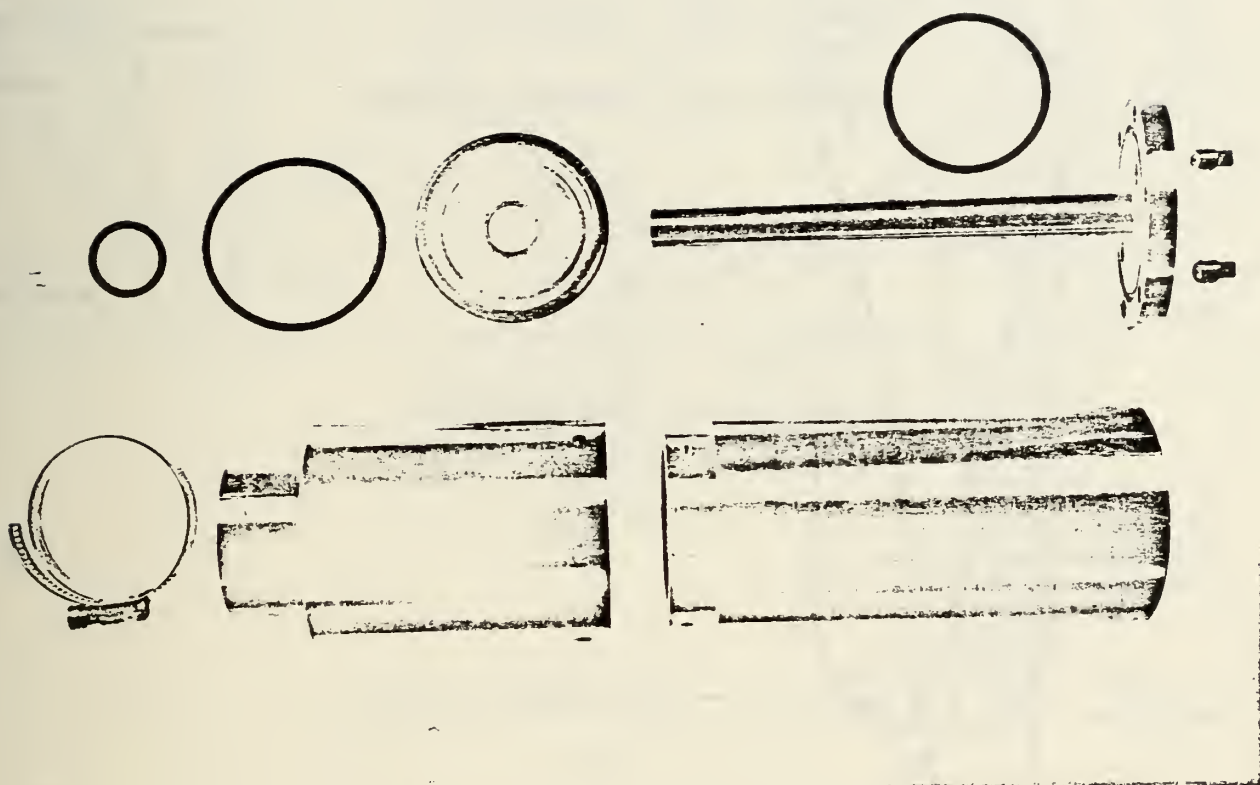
Disassembled cylinder showing components. From left to right across the top are the following: two O-rings, disc which shears and becomes a piston, tube inserted in end plate, an O-ring, and 3/8" pipe filler plugs. From left to right across the bottom are the following: hose clamp, hollow cylinder to provide stand-off space for shaped charge, and hollow cylinder to hold liquid explosive.
